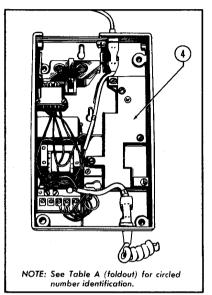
QSK191 Base Assembly—Showing Ringer Mounting Bracket
